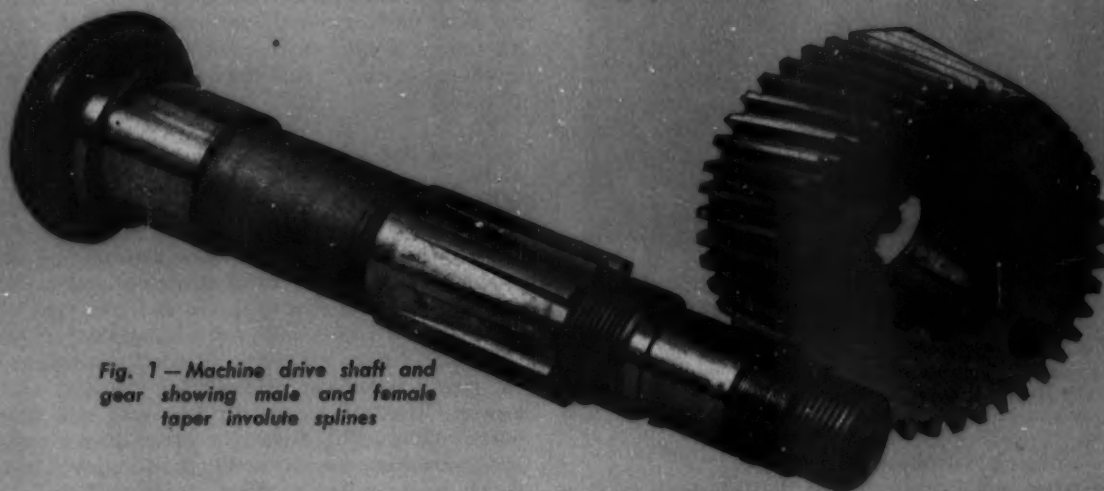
Machine drive shaft and gear showing male and female taper involute splines
